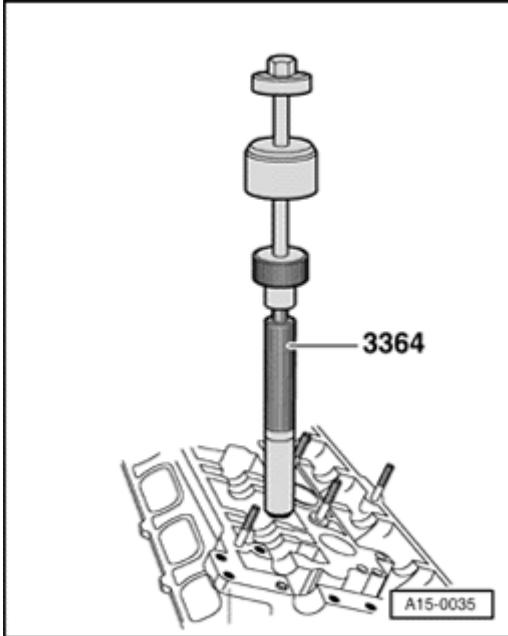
Removing Valve Stem Seals Using Valve Stem Removal Tool 3364
